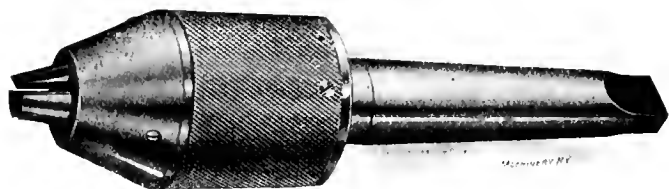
Coit's Ball-bearing Drill Chuck, made by the Standard Machinery Co., Mystic, Conn.
